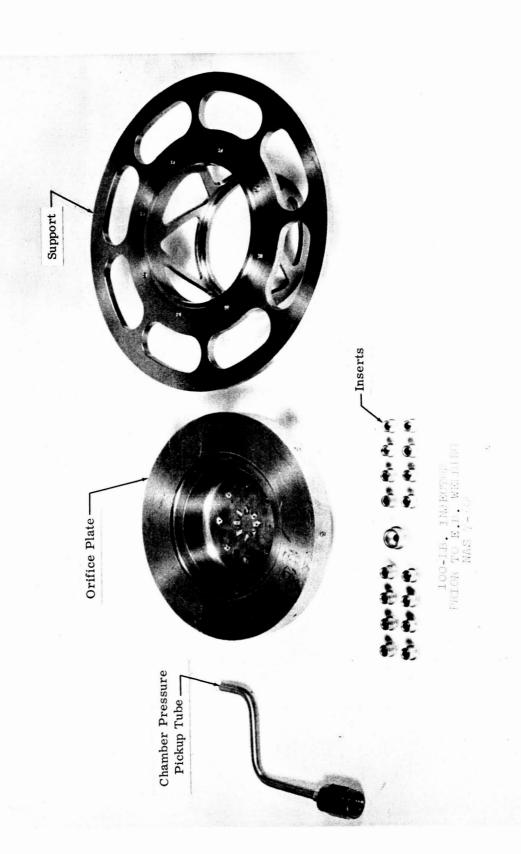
100-lb Injector Prior to Electron Beam Welding
